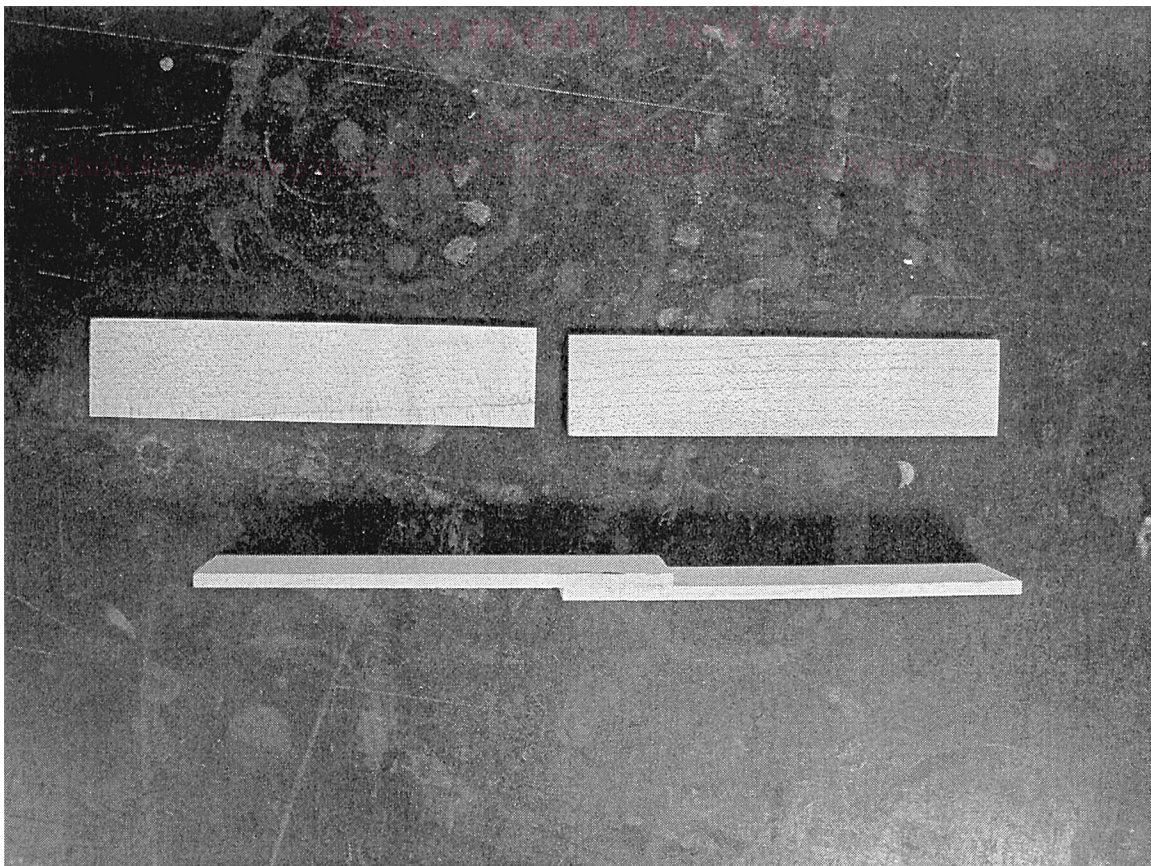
Test Method B, Maple Strip Lap Shear Test—Test Strips (top), Test Assembly (bottom)
